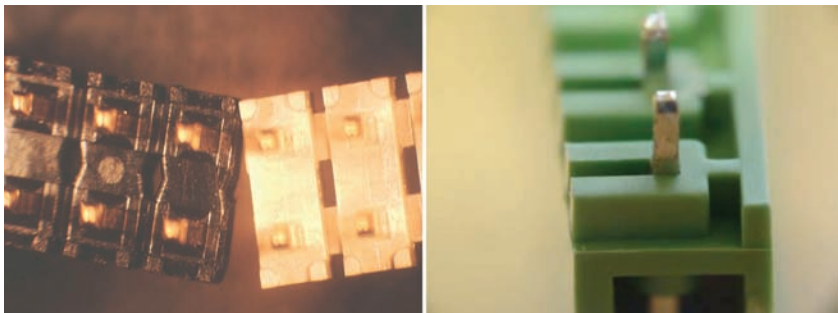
Moulding footprints and stand-offs that may require modification to the stencil design to avoid solder balls during reflow. If paste is printed under the plastic body, it will be displaced during placement and lead to micro solder balls.
